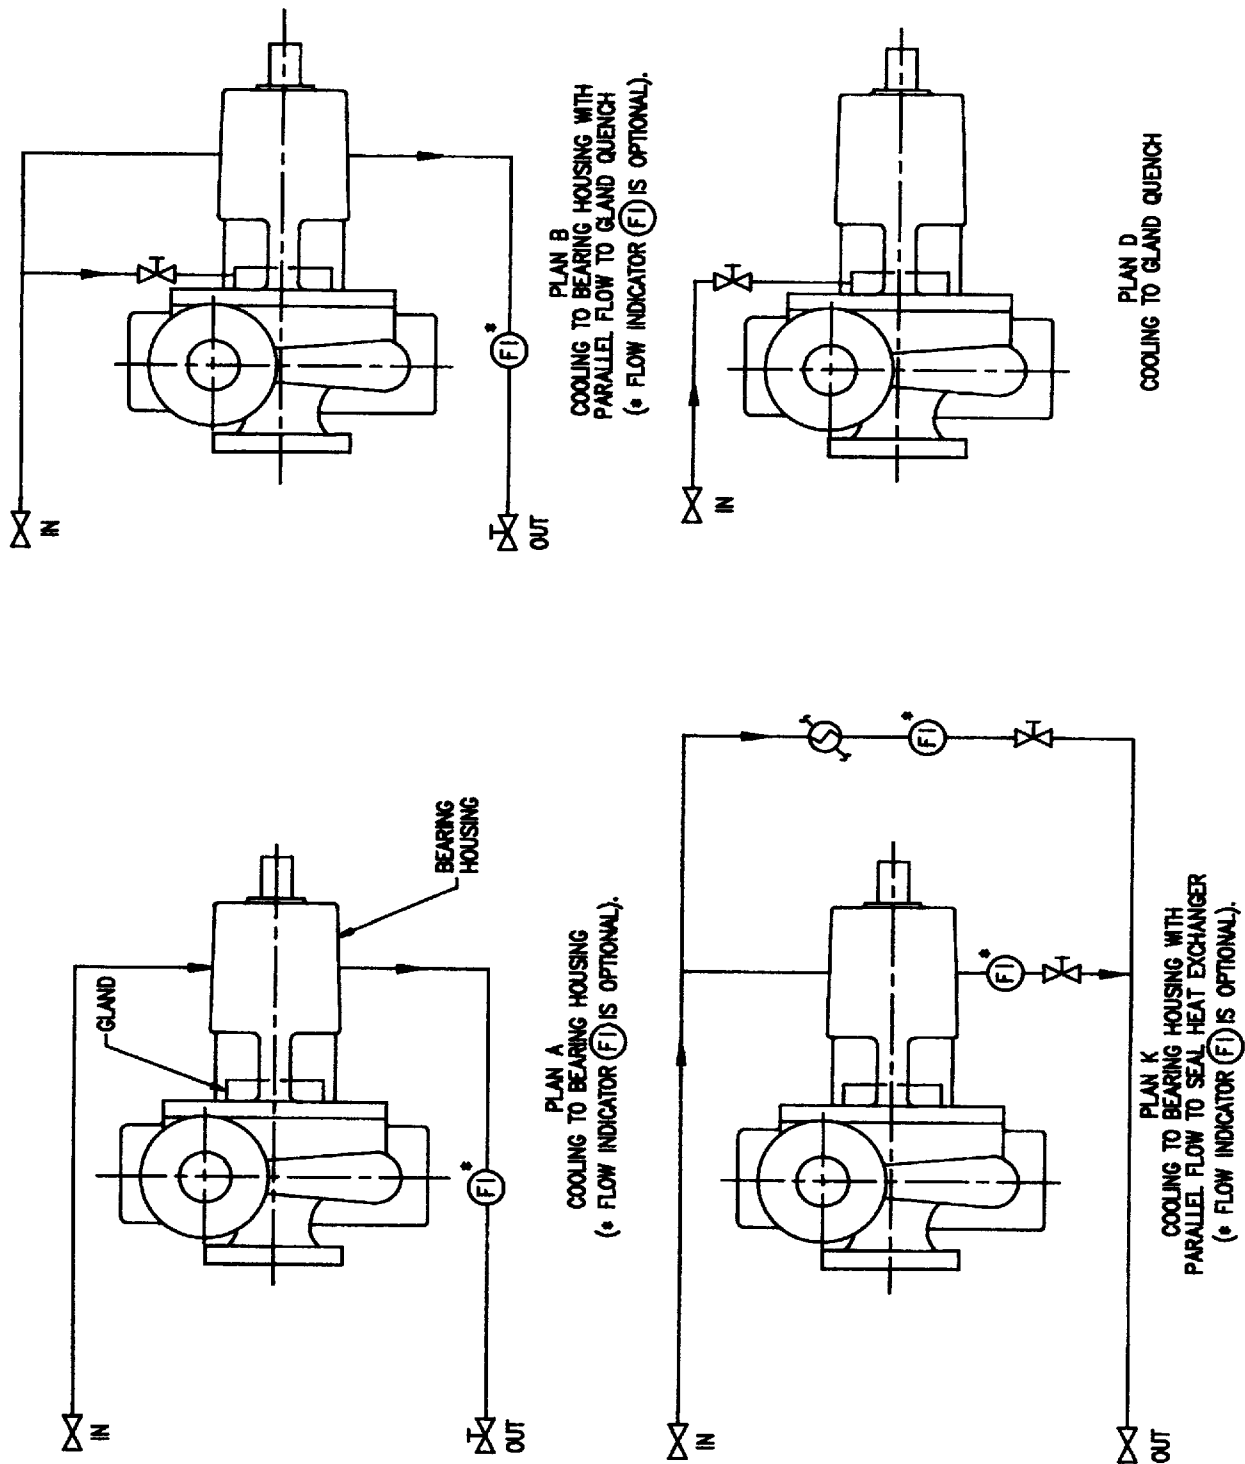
A—Cooling Water Piping for Overhung Pumps—Plans A, B, D, and K
